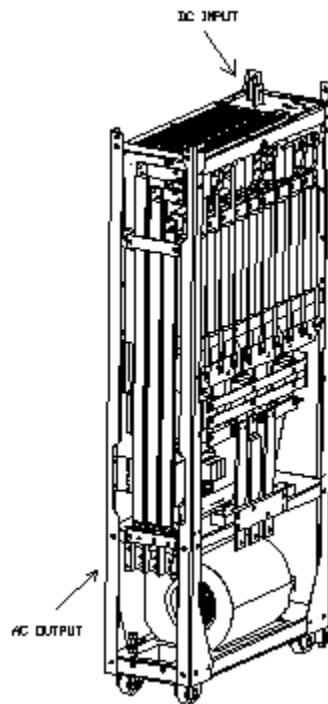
AFE 3D drawings – Front AC OUTPUT
